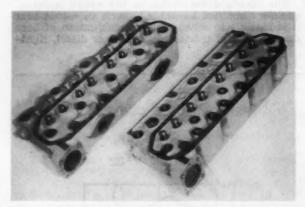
Cylinder head for 4-cyl engine, (left) diesel head, (right) gasoline-engine head.
